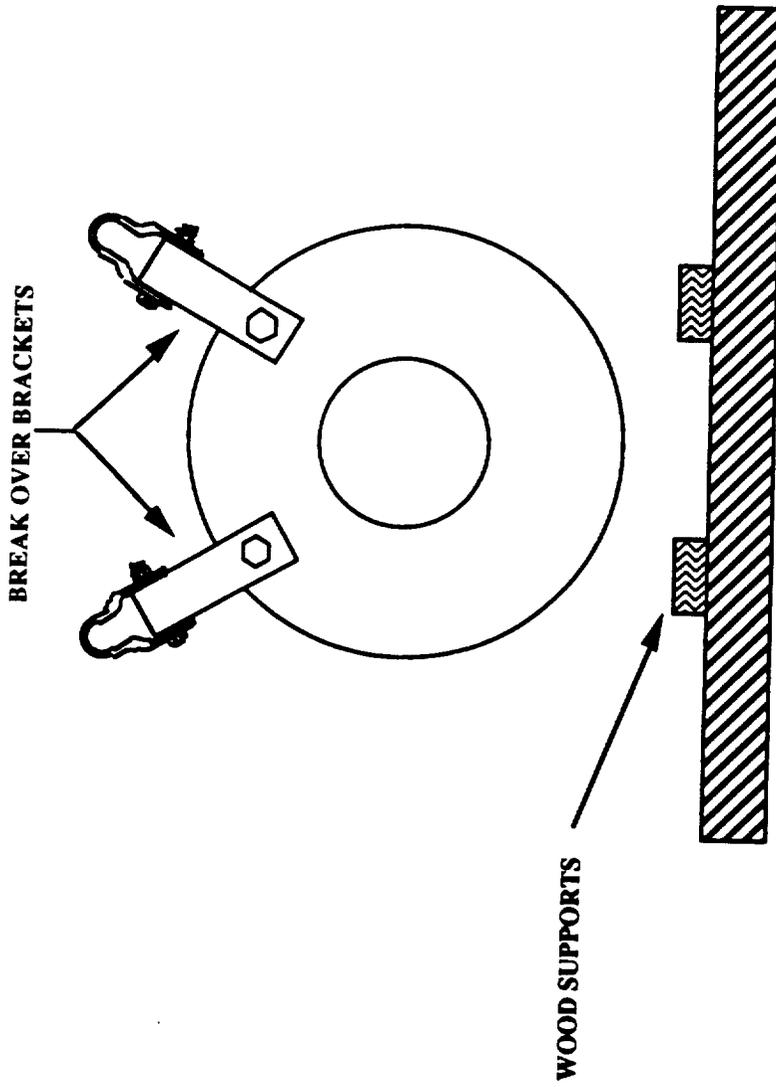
BREAK OVER BRACKET ASSEMBLY
